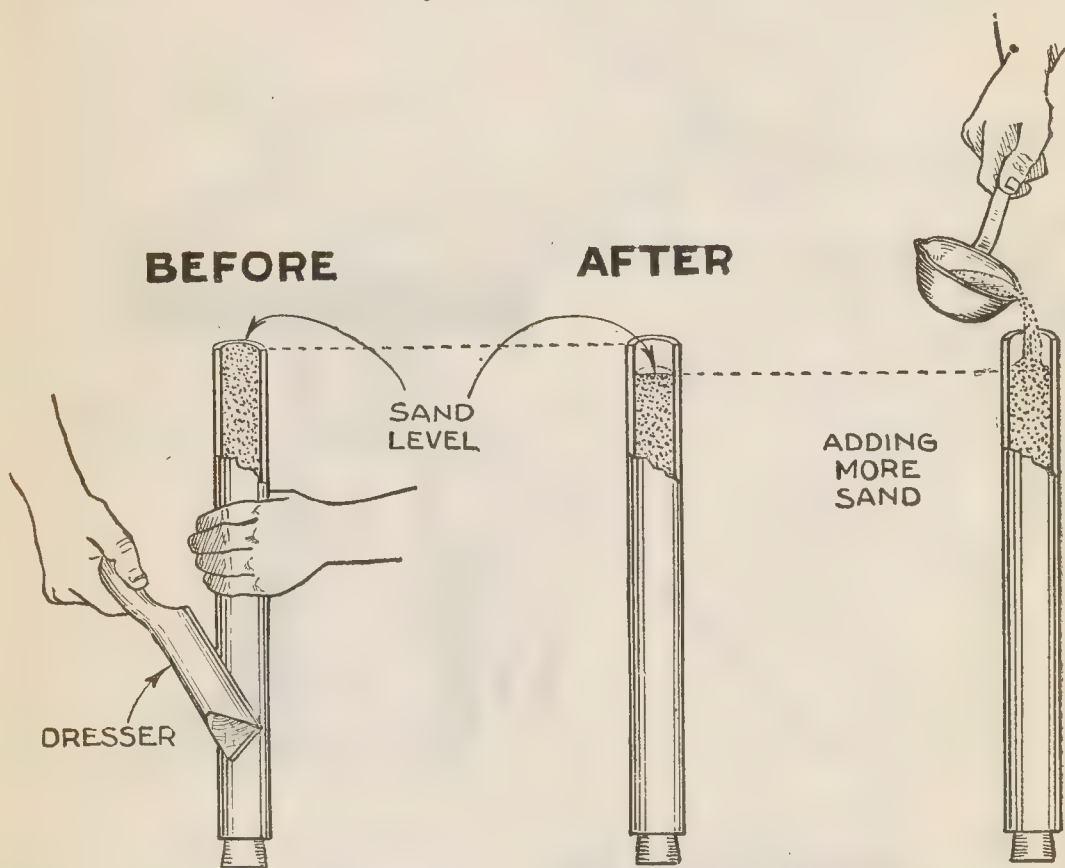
,499 and 6,500.—*Bending with sand, 1.* Operations of filling pipe with sand preparatory to bending and method of warming the sand by placing in a shallow pan over a gasoline furnace or other source of heat. The hot sand is conveniently poured into the pipe by using a ladle and funnel, the sand being heated as in fig. 6,500.
